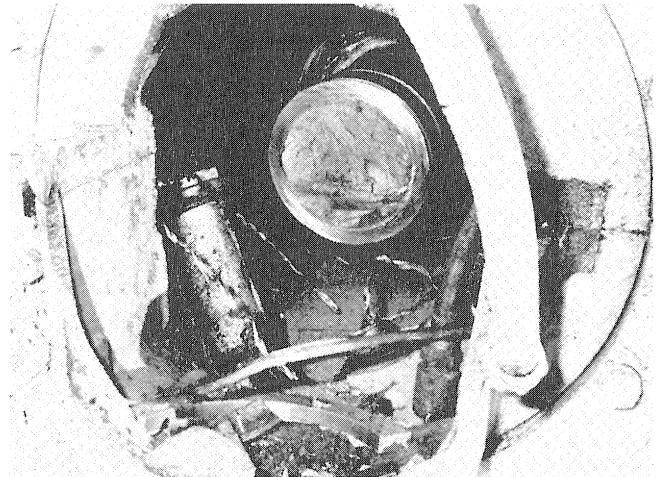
Looking Through Damaged Bearing Housing of Inboard Motor at Broken Shaft End.
